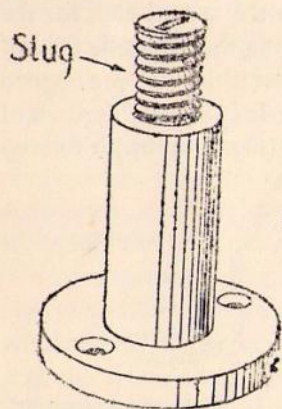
Bakelite Coil Former with Threaded and Adjustable Dust Iron Core ('Slug').
